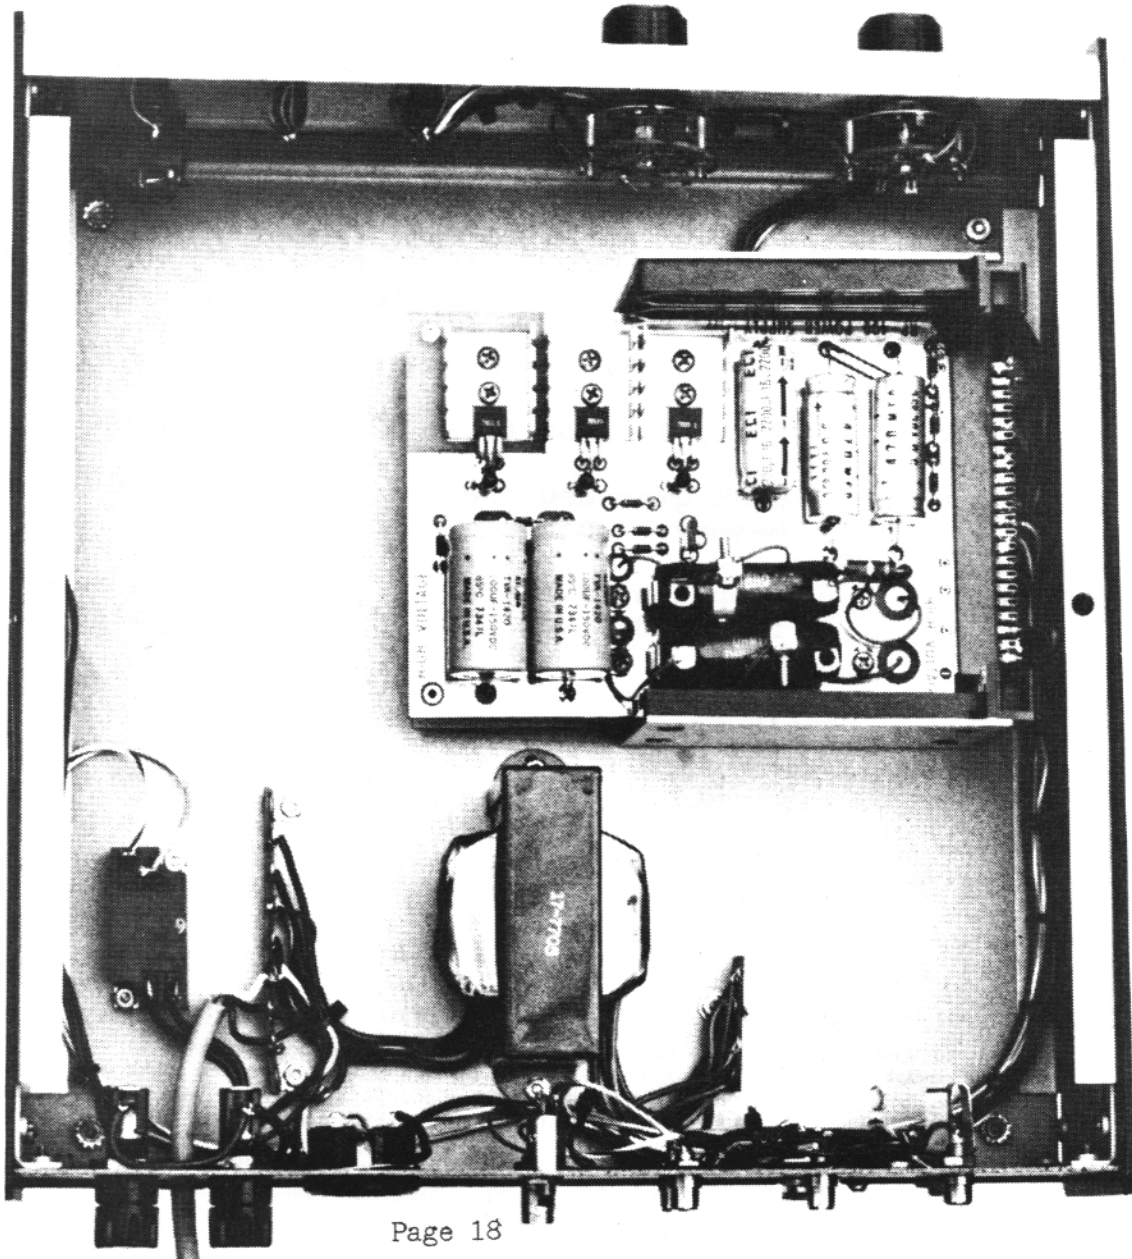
Photograph of RP-400 Power Supply circuit board. The board is 4½" x 6" in size. See parts list for RP-400 Kit information.
